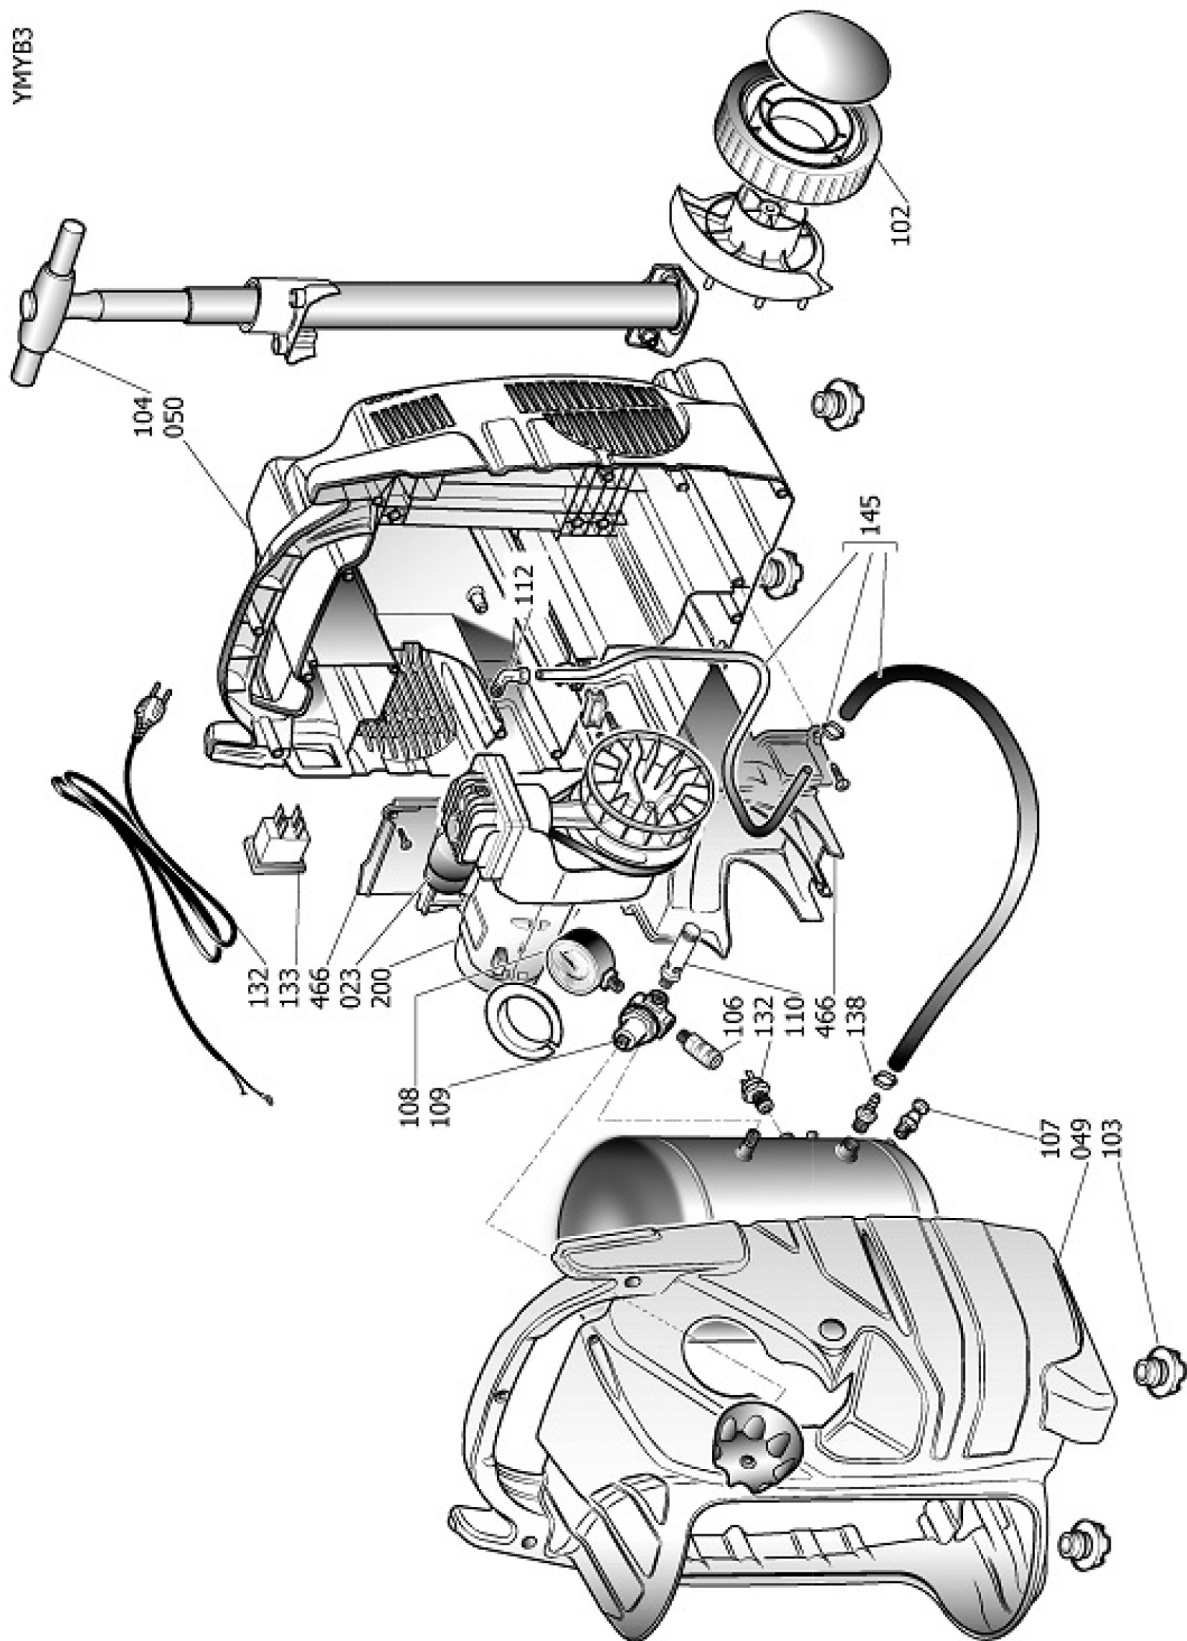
Spare parts drawing 1 MOBILBOY 185 OF E
